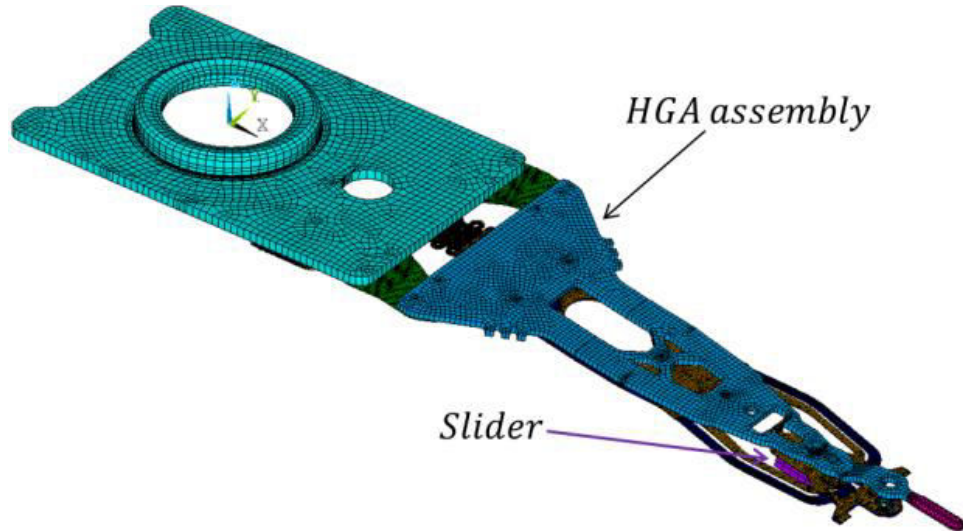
Finite element mesh of the Head Gimbal Assembly.
